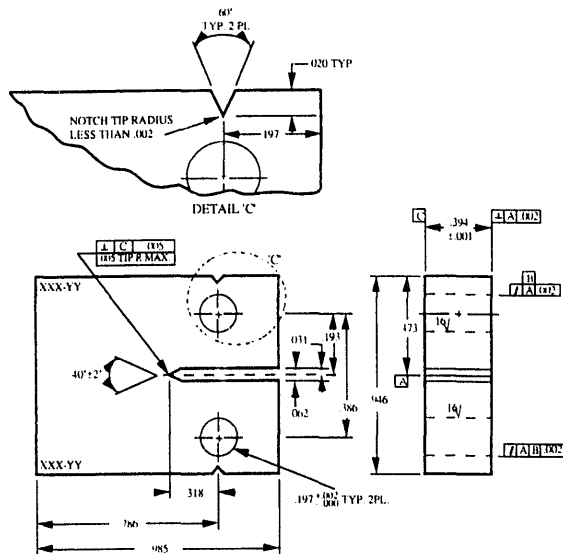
E399 SR 0.4T Compact Tension Specimen Dimensions (inches) [8]. The final specimen design included 20% (10% each side) sidegrooving of the notch plane.
